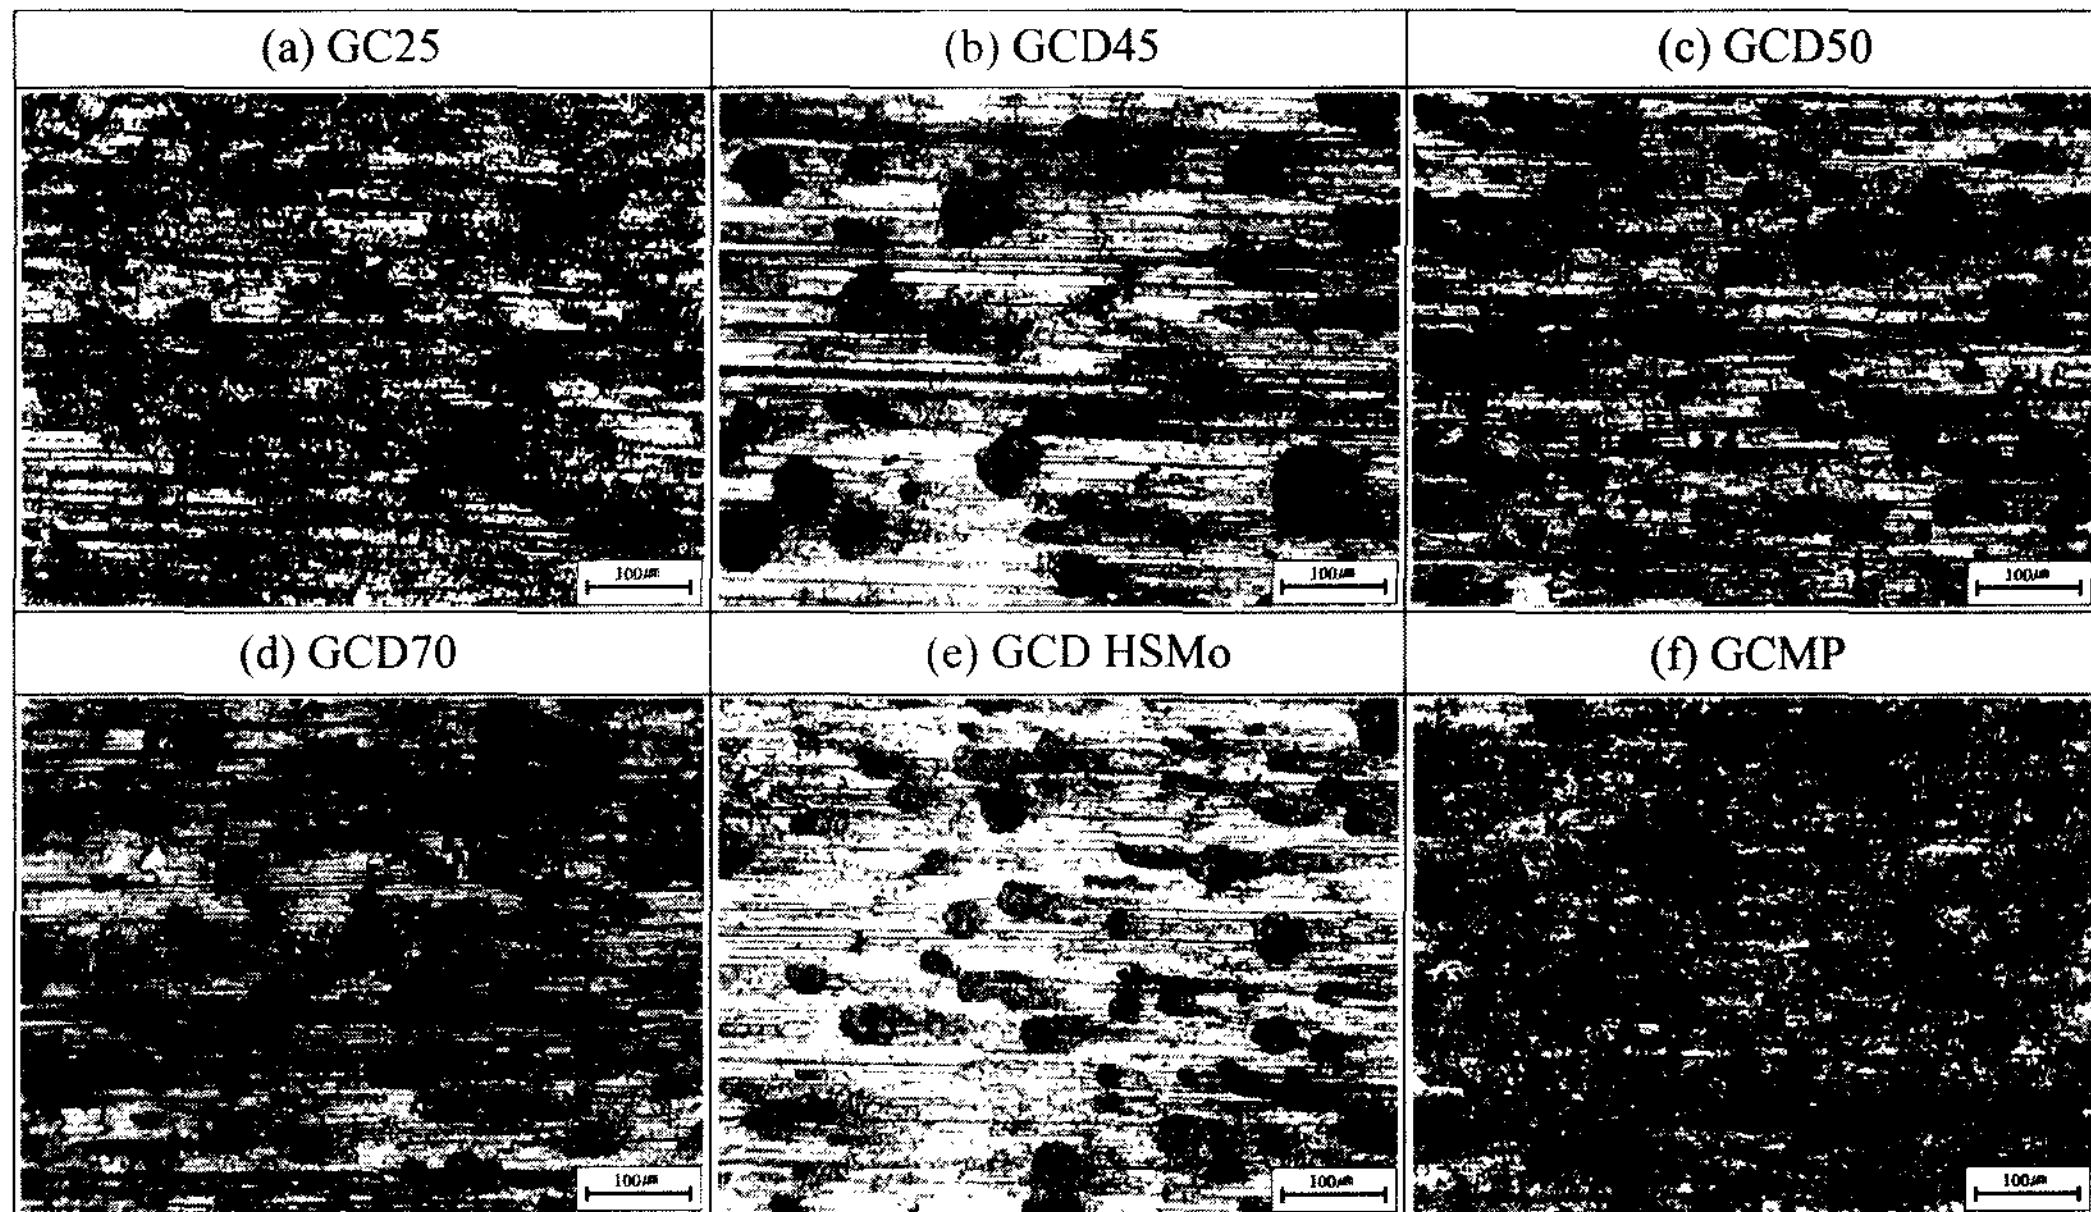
The photographs of cutting surfaces (Cutting direction →).
